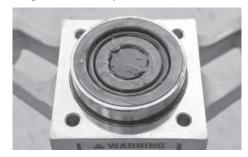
View of the Lower Driver Body Assembly when removed from the post driver.
